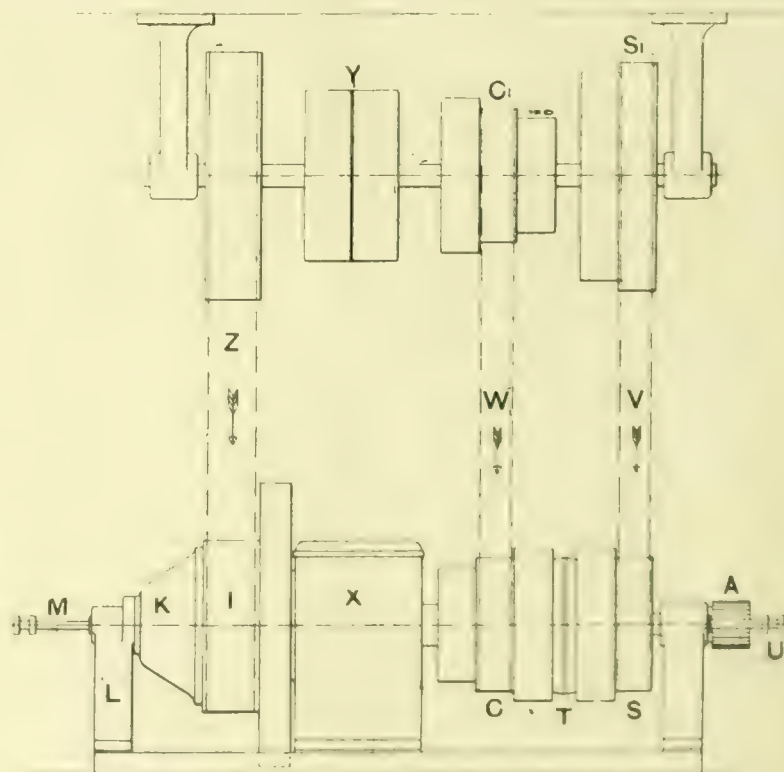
REVERSING MECHANISM FOR PLANING MACHINES.
